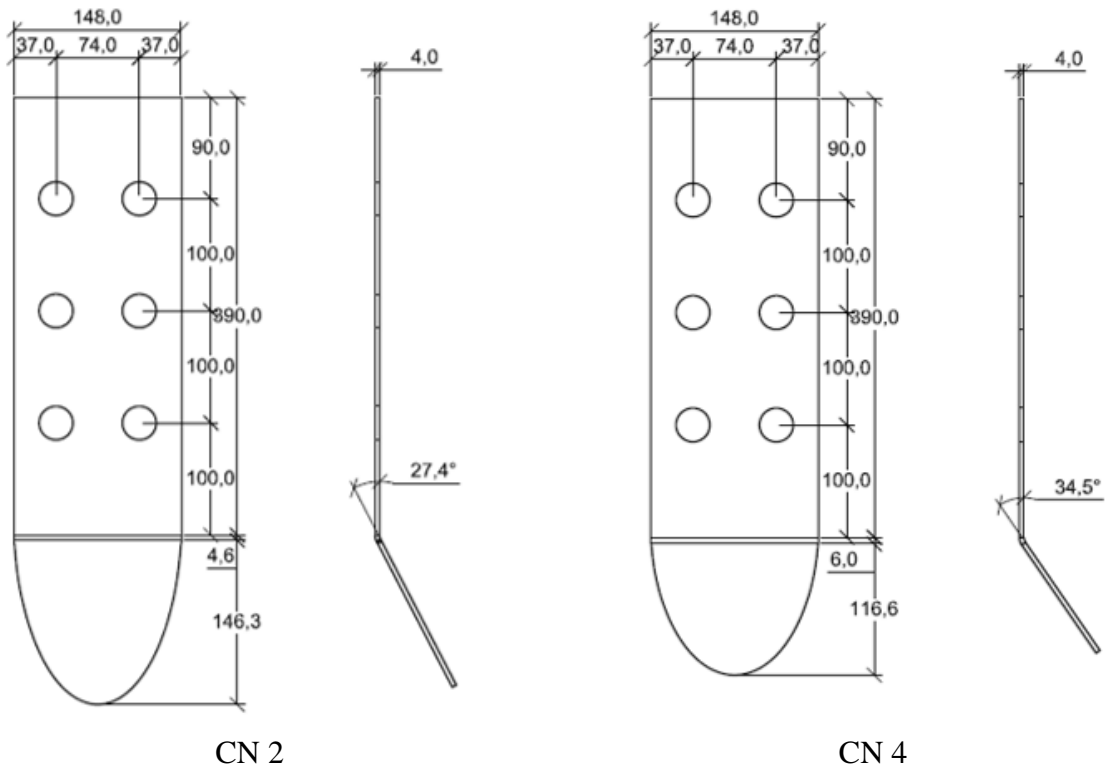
Dimensions of the inclined plates without the connecting plate. Units in millimetres.
